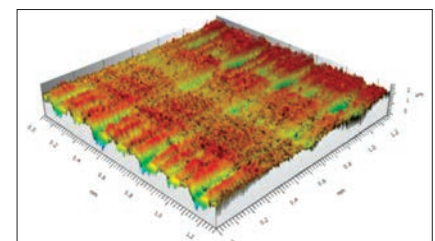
Geometric structure of the 3D surface after turning with wiper blades
